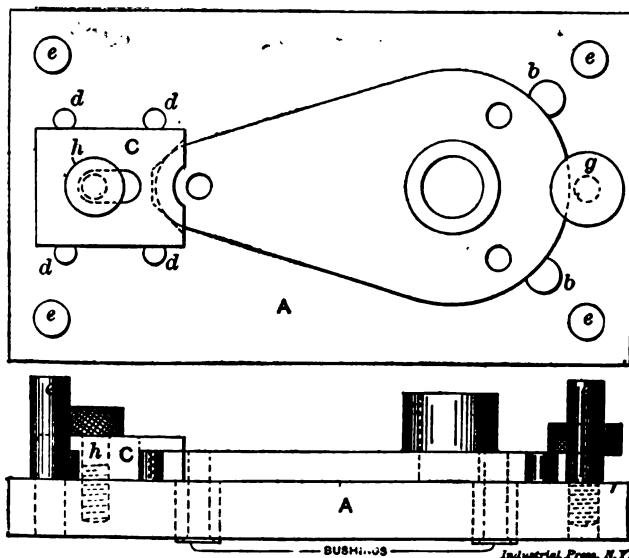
Jig for Drilling Piece Shown in Fig. 48, with Work in Position
